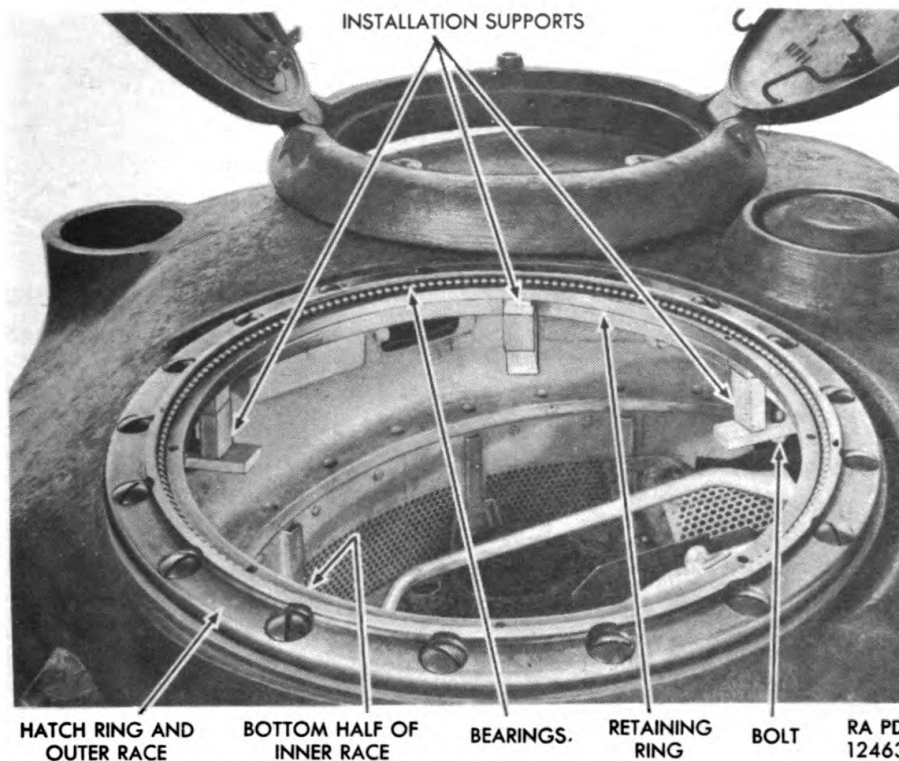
Hatch Ring Inner Race Supported for Hatch Ring Removal
